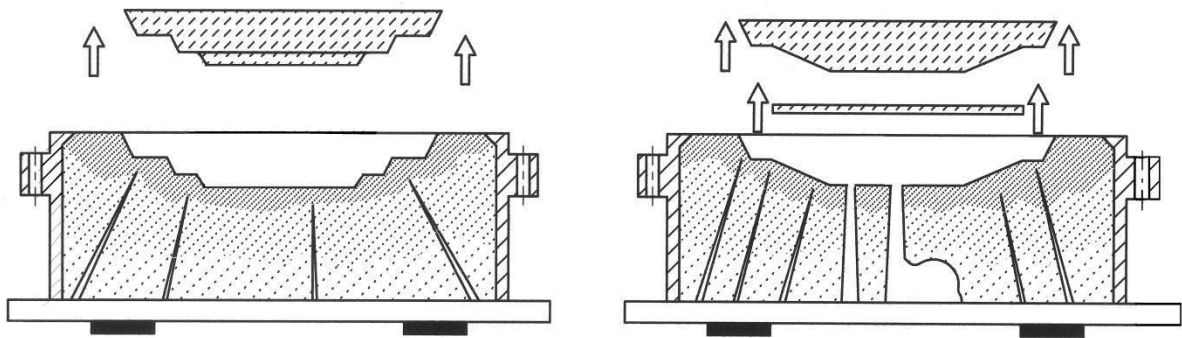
Ejection of split pattern, gate, and dirt catcher from mould
